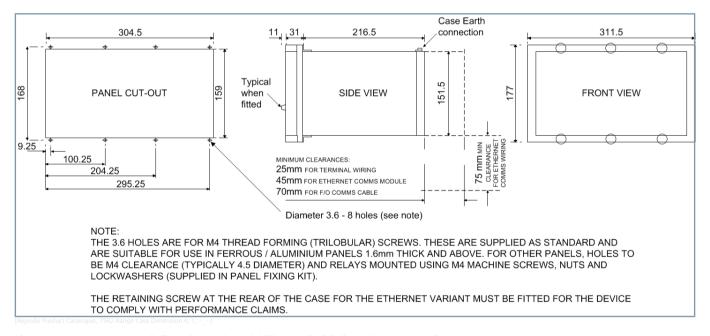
/12 E12 Case overall dimensions and panel drilling details (All dimensions are in mm)
